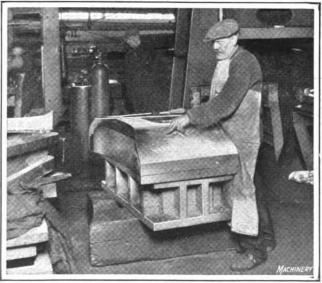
Hand filing a die after removing it from die-sirkting machine.
